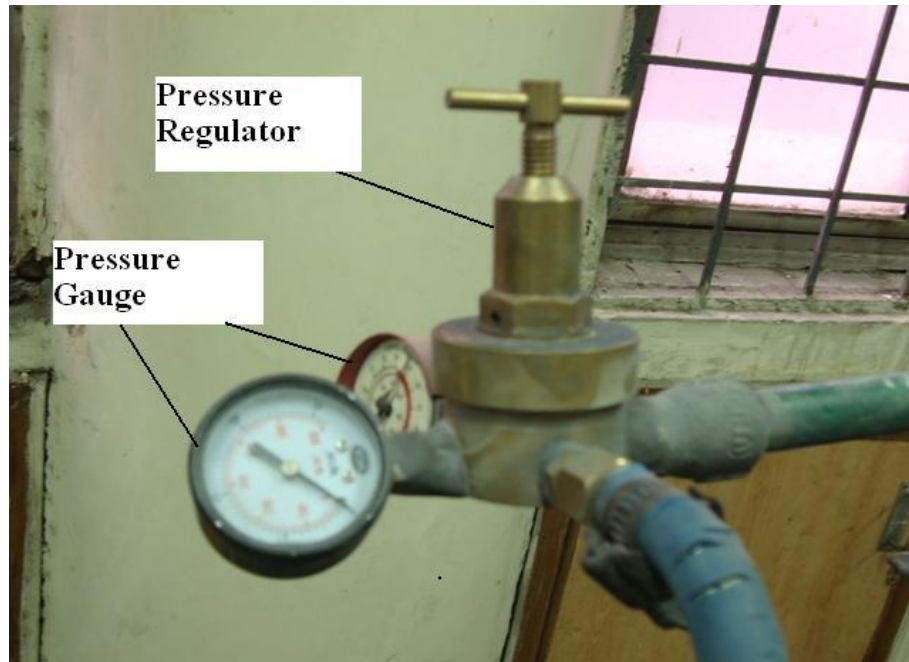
Pressure Gauge and Pressure Regulator of Abrasive Jet Machine
